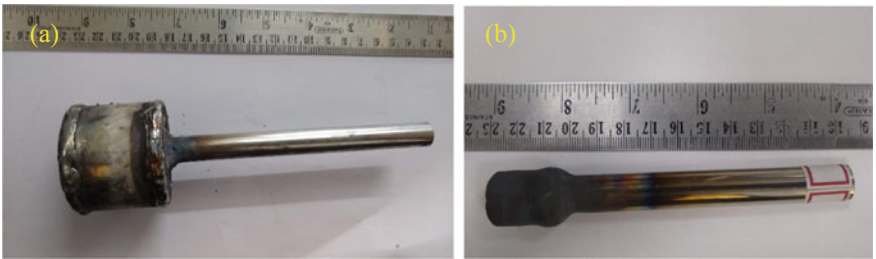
Canned specimen of a 40 mm diameter and b 16 mm diameter
